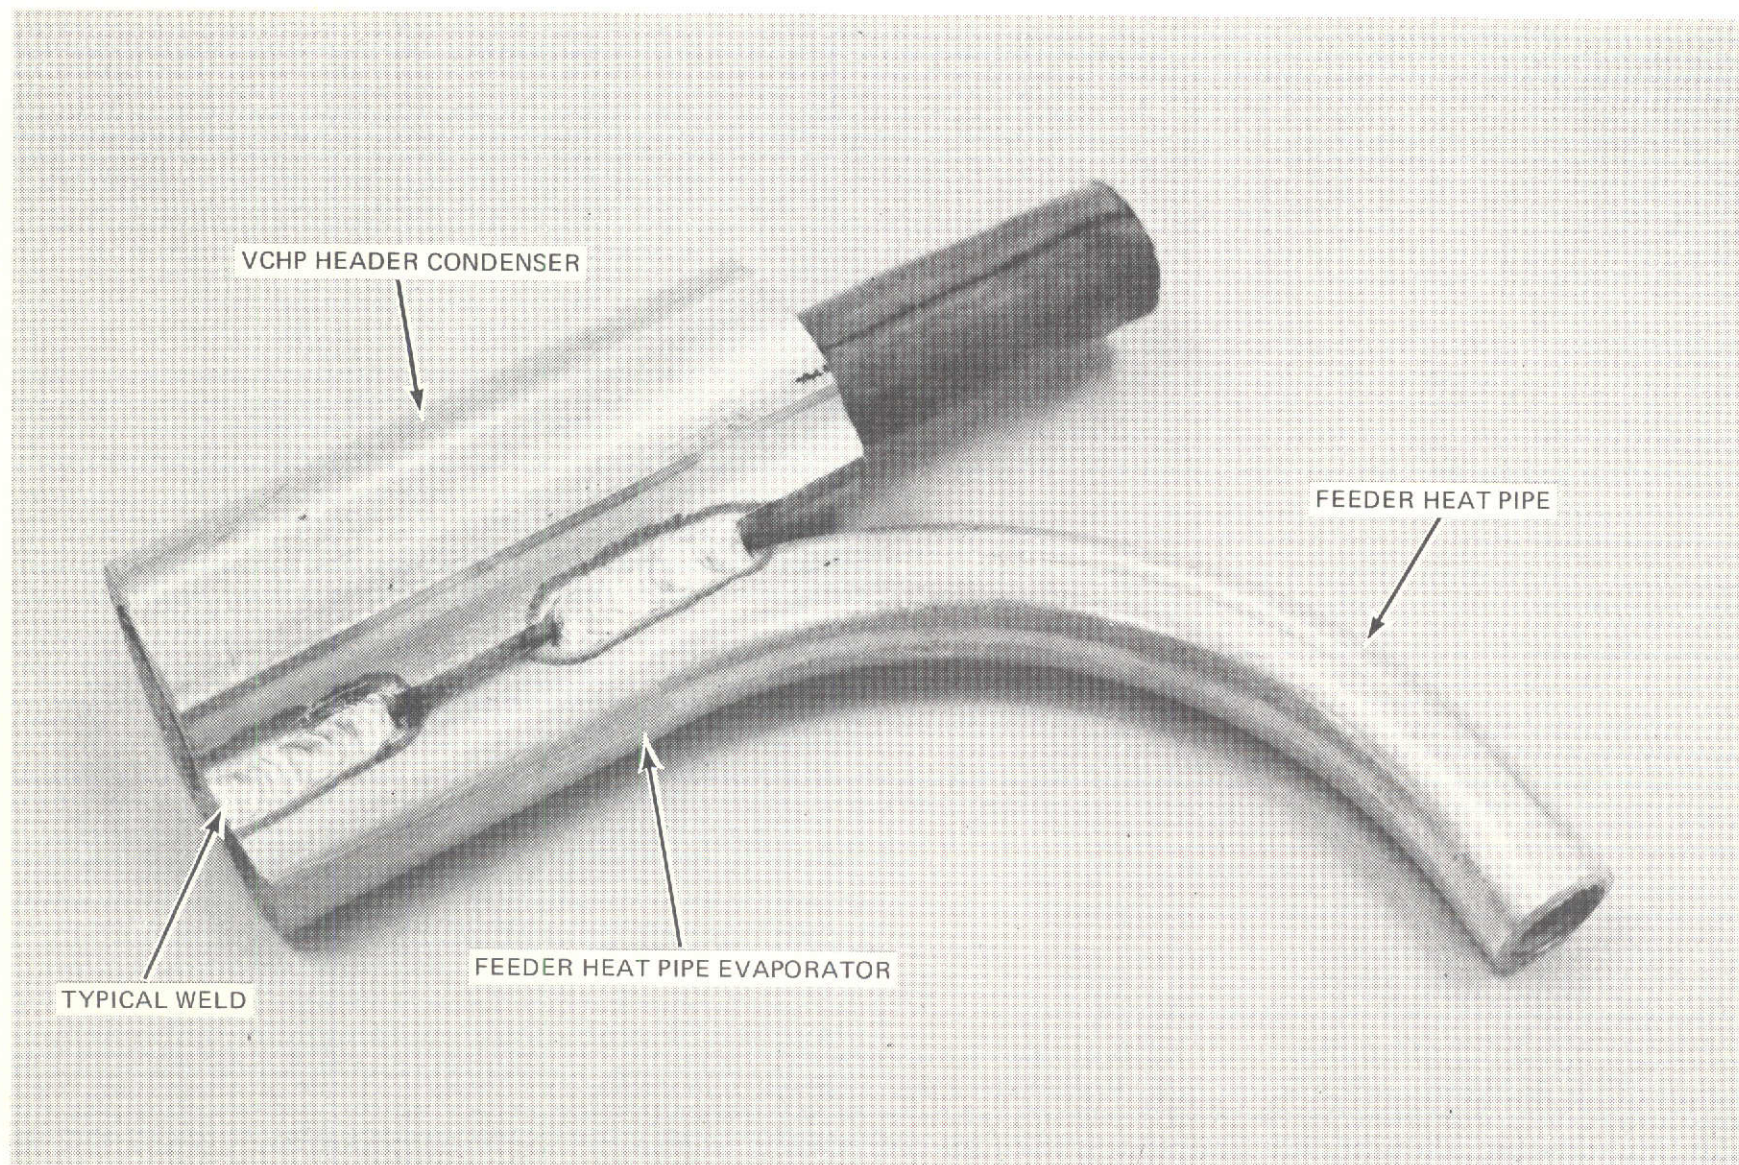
VCHP Header/Feeder Pipe Welded Interface
